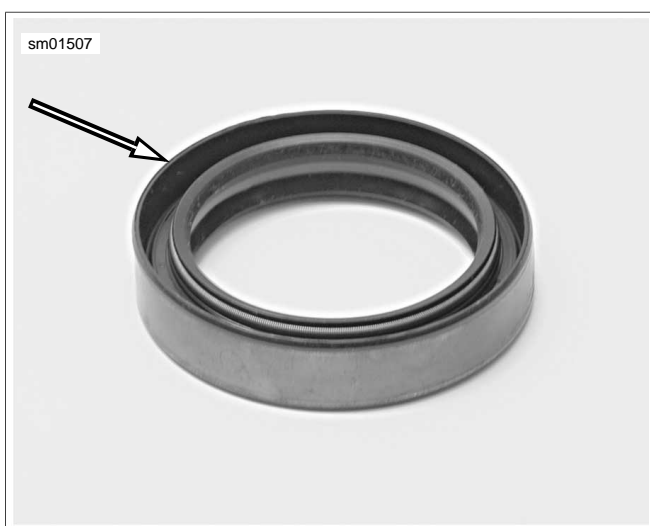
Open (Lipped) Side of Seal Faces Out
